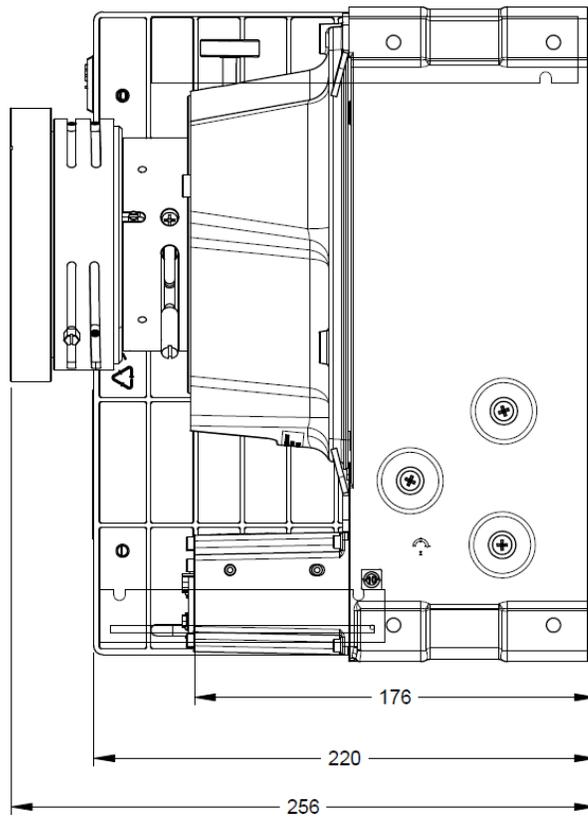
Mirage WU-L Side Dimensions with 0.64 Lens
